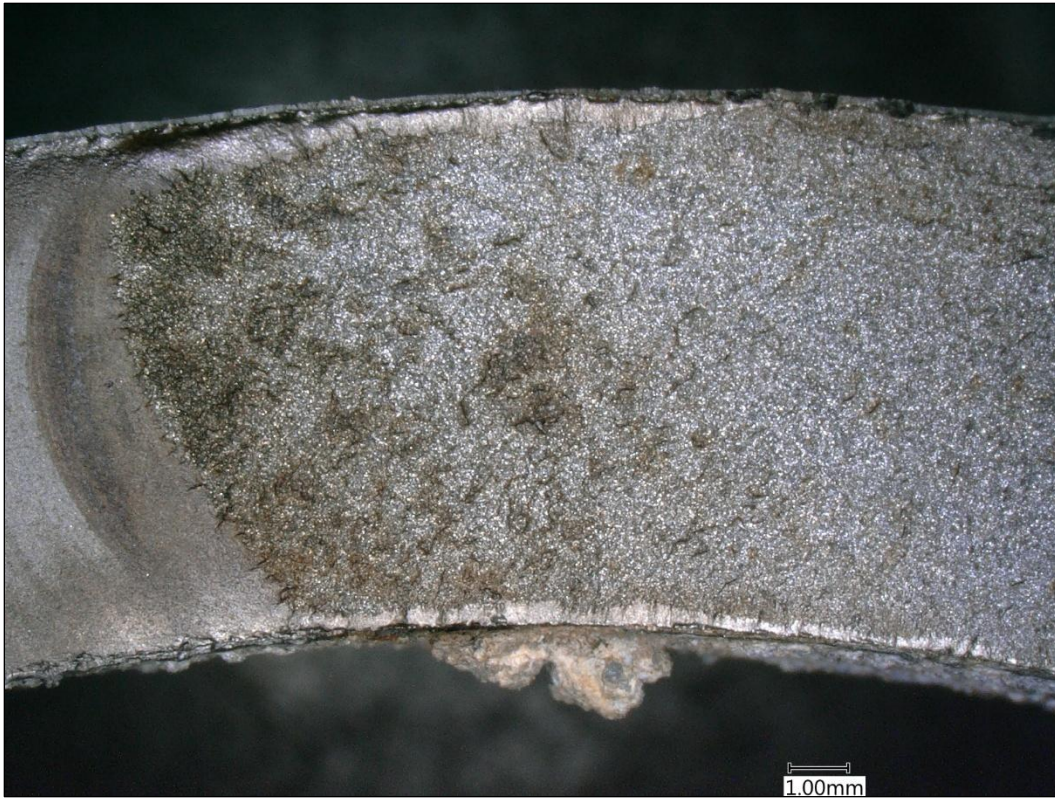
Reference 21 end of fatigue and start of brittle fracture heading away from thumbnail.
